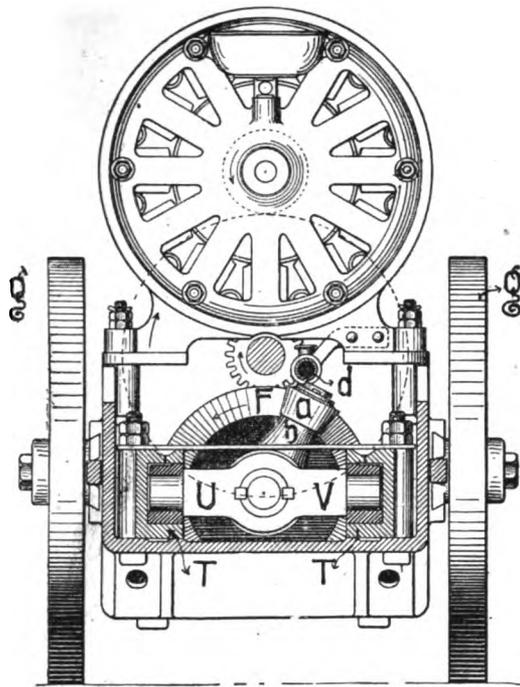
DETAILED VIEW, SHOWING REVOLVING CAM, THUMB AND CROSSHEAD.
